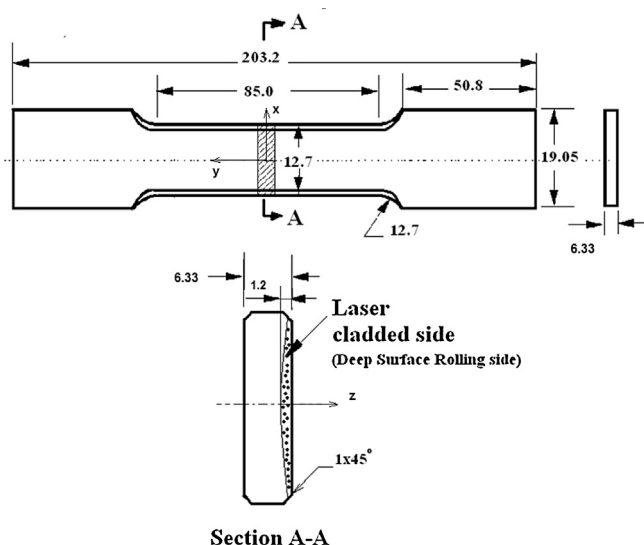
Laser cladded specimen geometry (All dimensions in millimetre).
